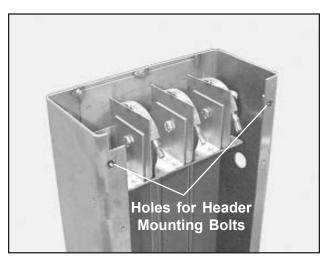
Top of Column Showing Header Mounting Bolt Holes
